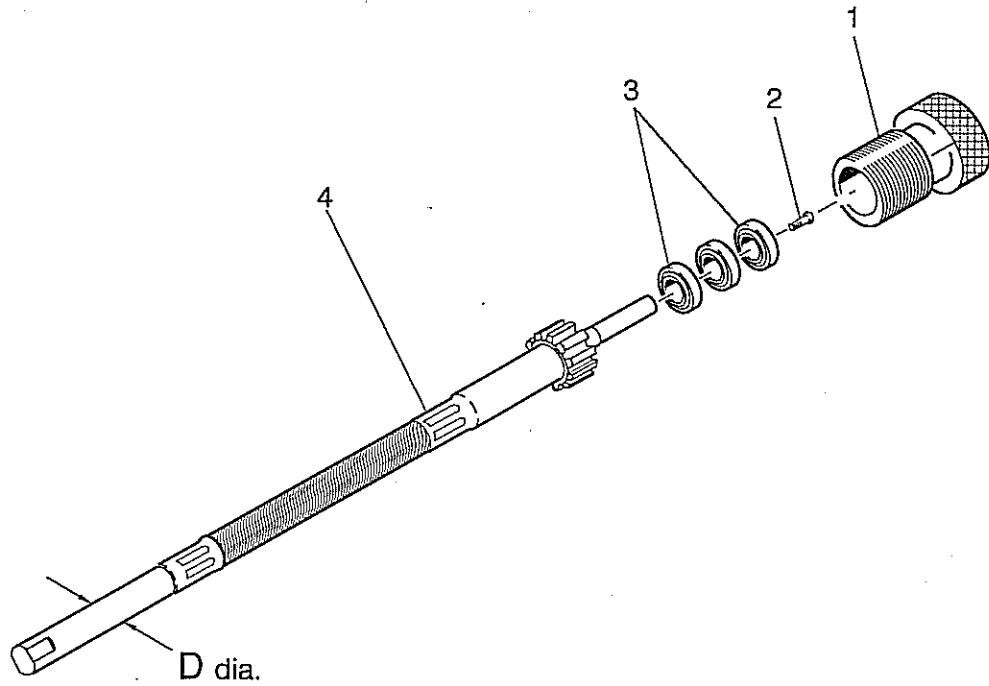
GEARS AND GEAR CAP GROUP-MODEL II TOOLS
